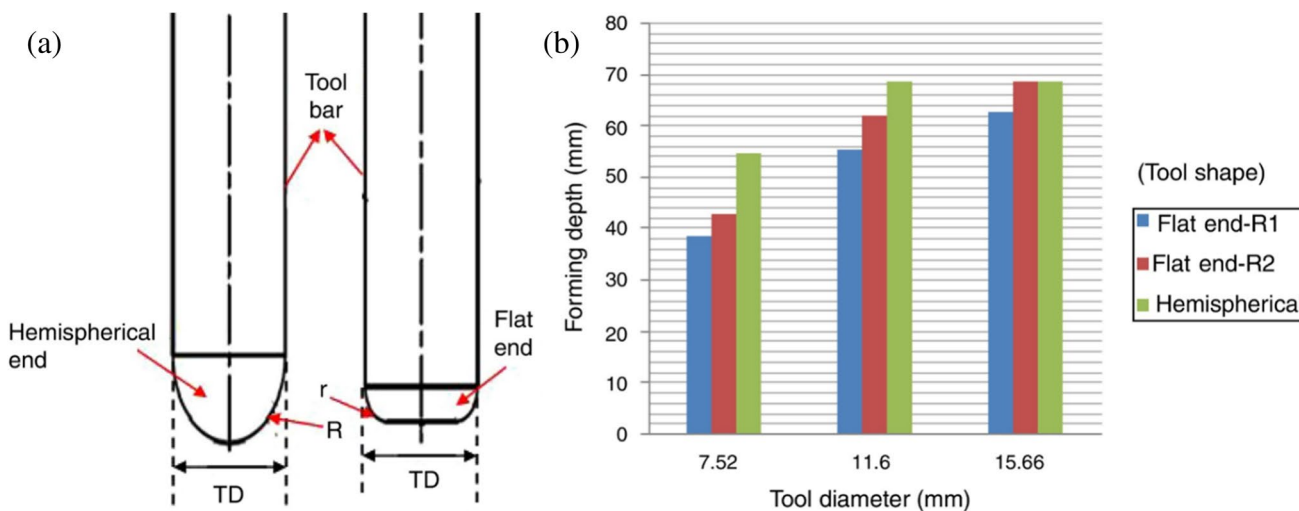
Conventional tool and effects. a Tool shape and diameter, b effect of tool diameter on forming depth [62]
